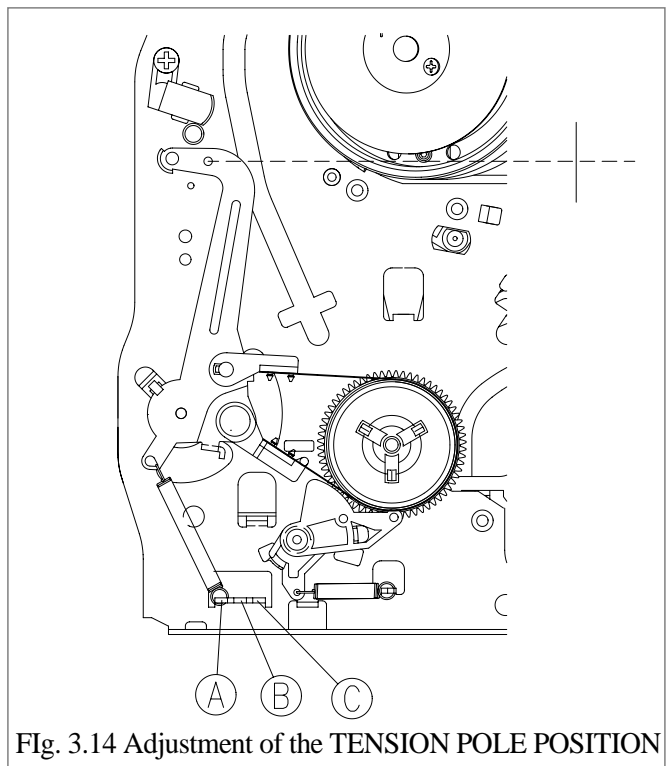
Adjustment of the TENSION POLE POSITION
